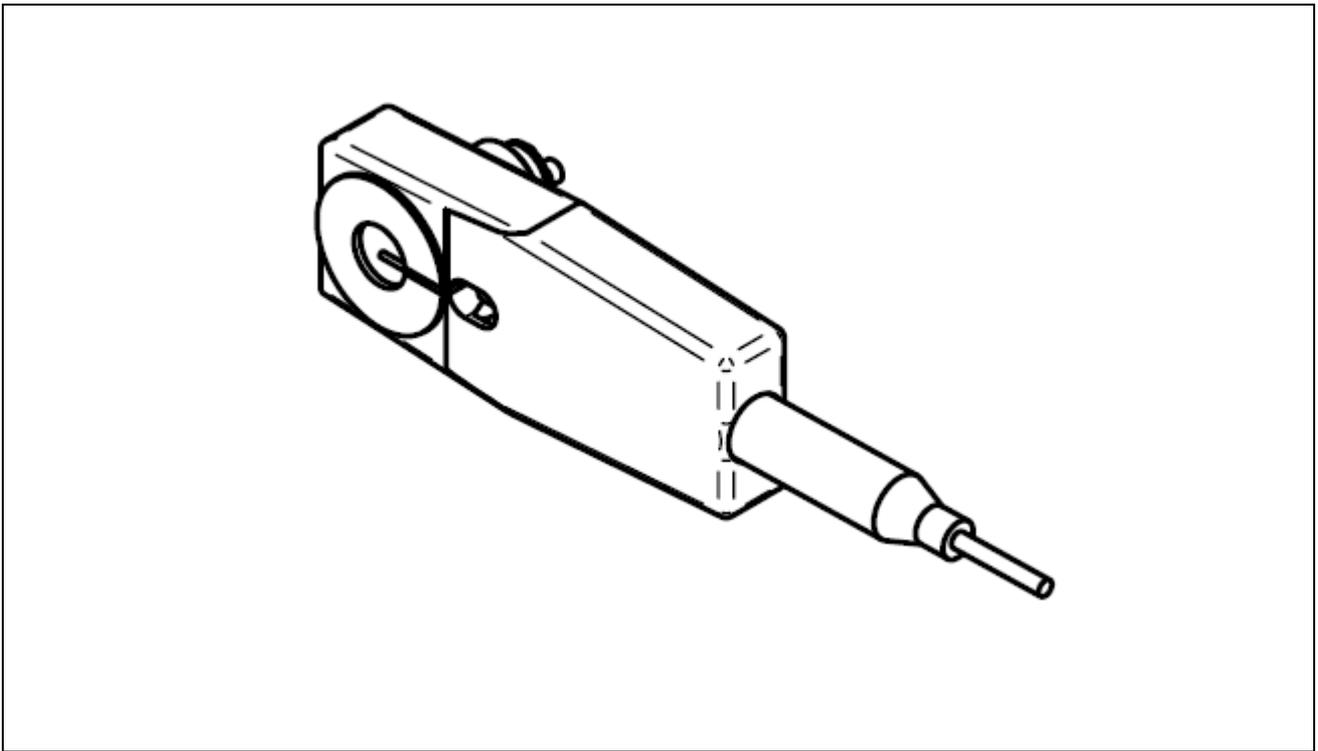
3D view of the mobile phone shaped impedance probe
